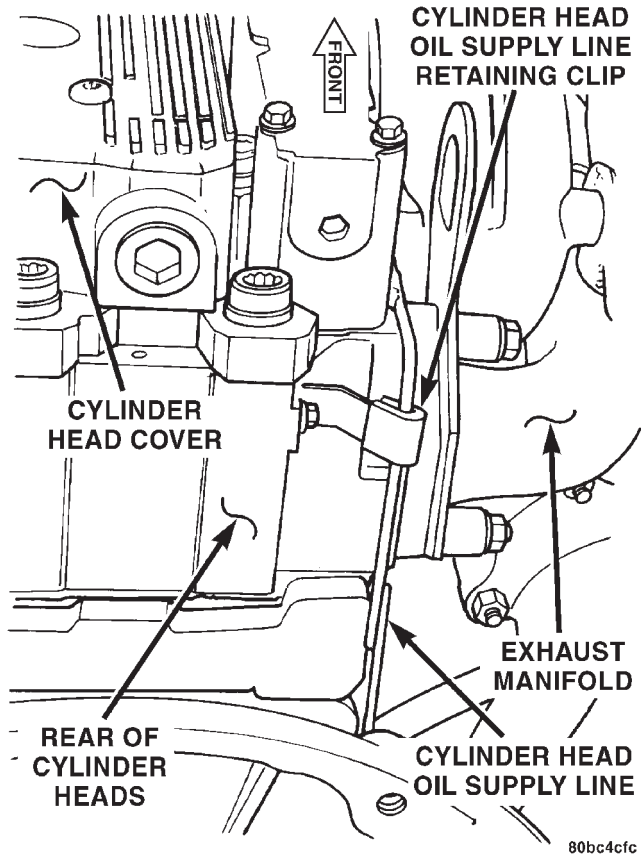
Cylinder Head Oil Supply Line Retaining Clip
